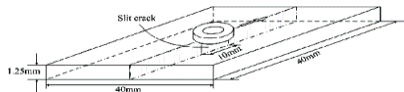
NDT-EC device Coil and CFRP plate with crack.
